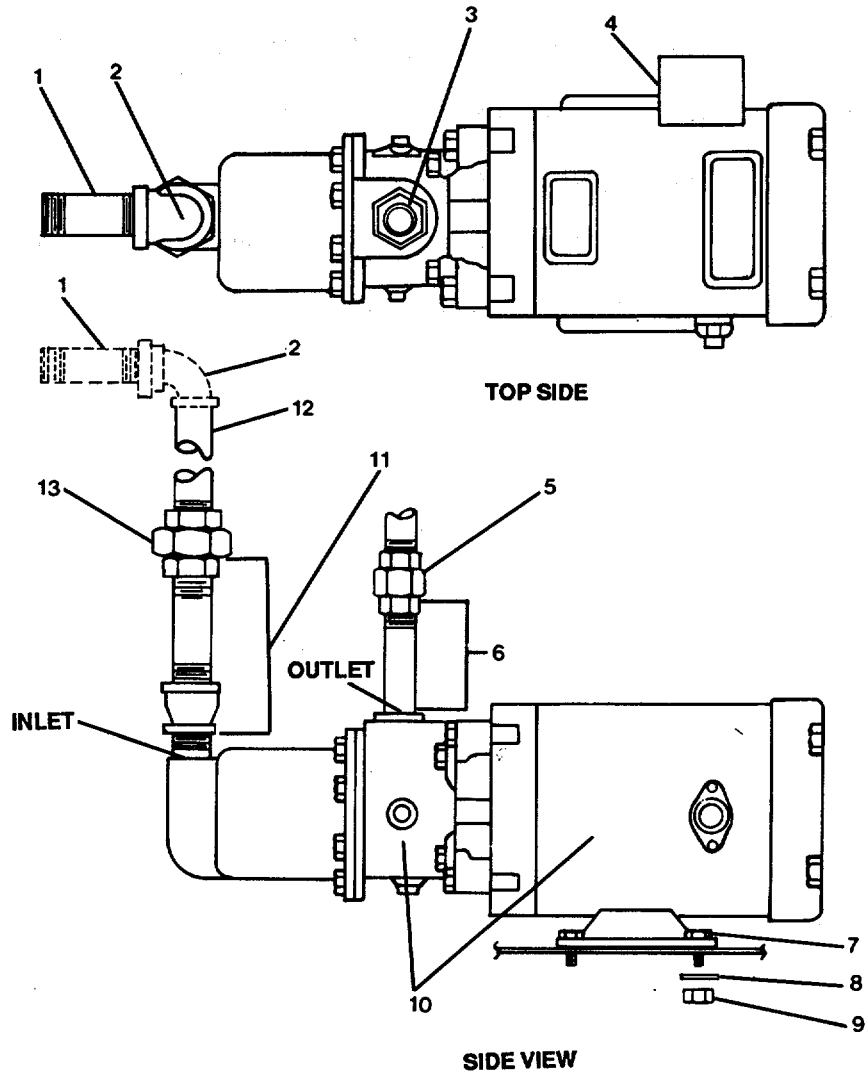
Oil Pump/Motor Assembly.
